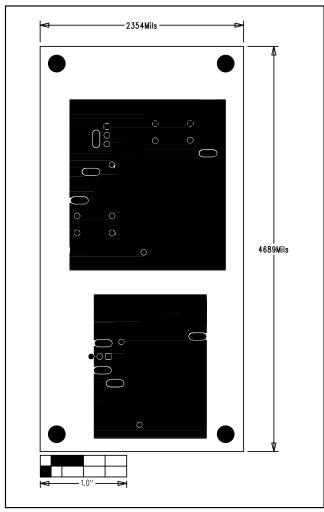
MAX8576 EV Kit PC Board Layout—Layer 2
